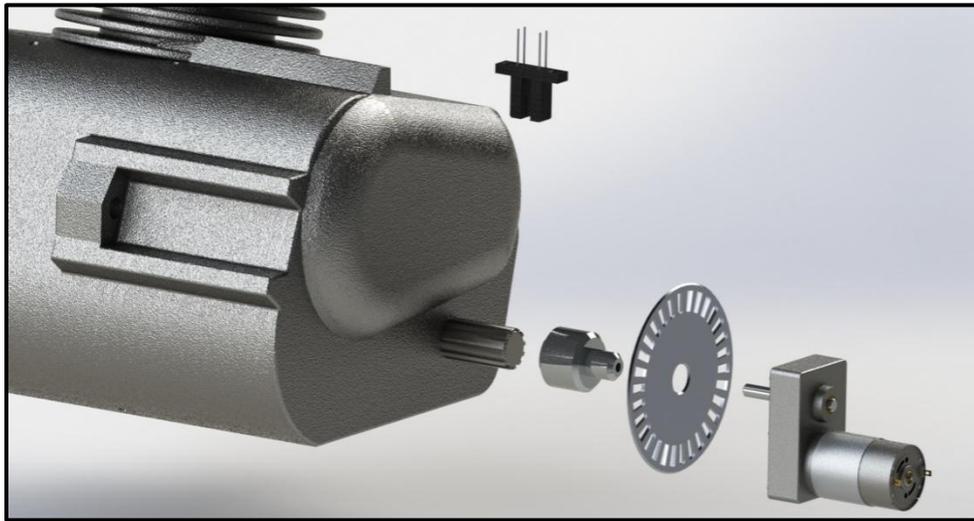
Actuating Mechanism Components exploded view (Solidworks 2014)
